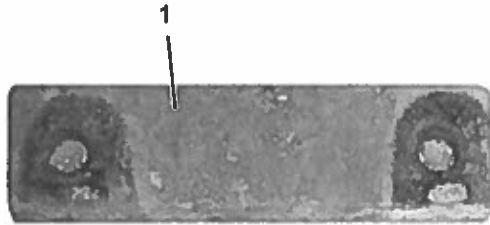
Front Axle Rear Spring Hanger – Driver Side.
